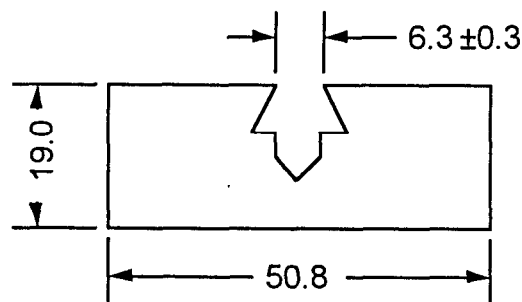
Disposable Extensometer Mount (Dimensions in Millimeters)
